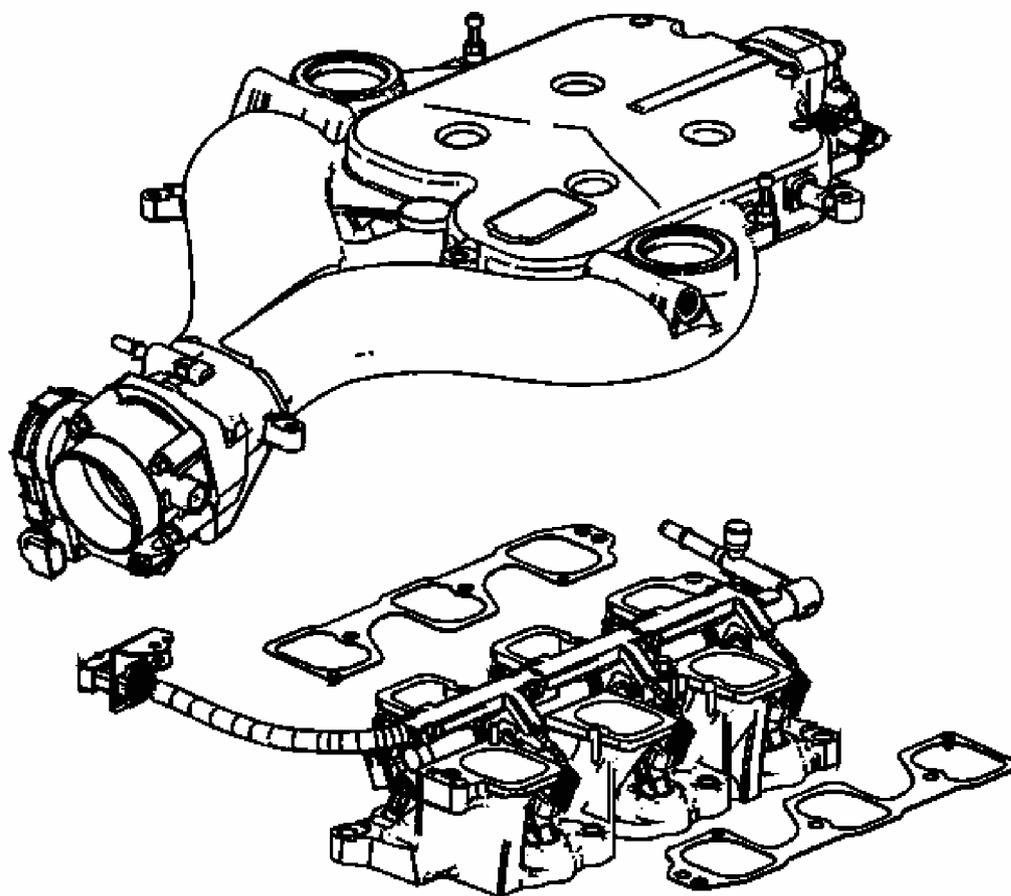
View Of Upper-To-Lower Intake Manifold Gaskets
